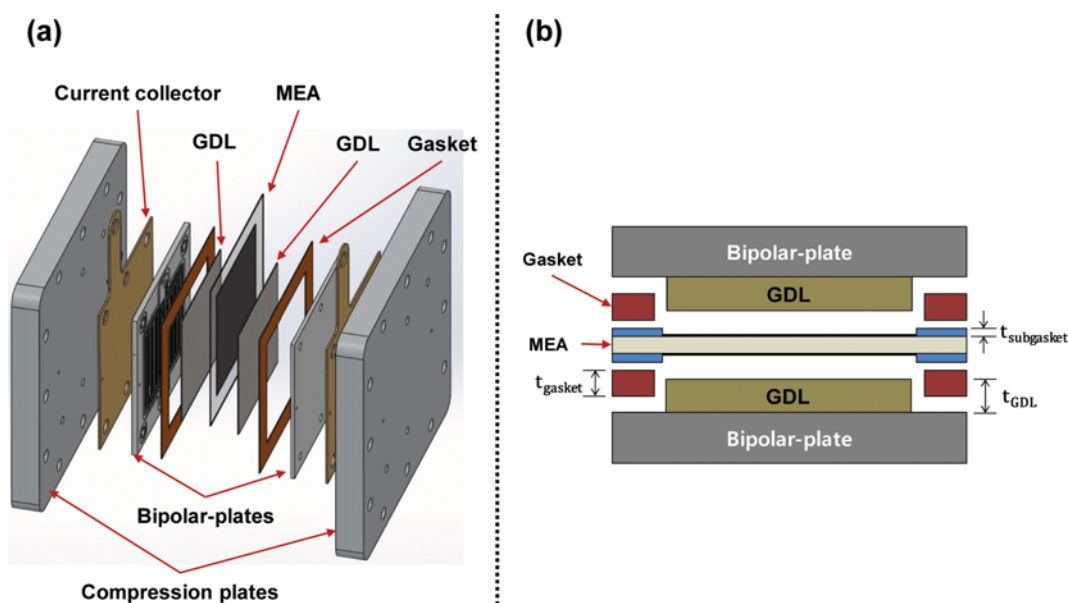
Structure of the PEM fuel cell: (a) Assembly drawing and (b) cross-sectional view.
